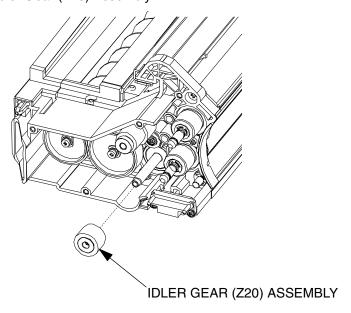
Removal of the Idler Gear (Z20) Assembly
